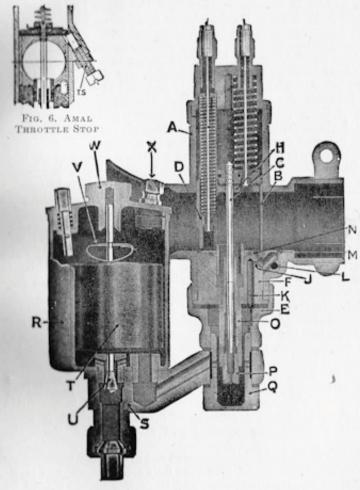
Sectional View of Amal Needle Jet Two-lever Carburettor
